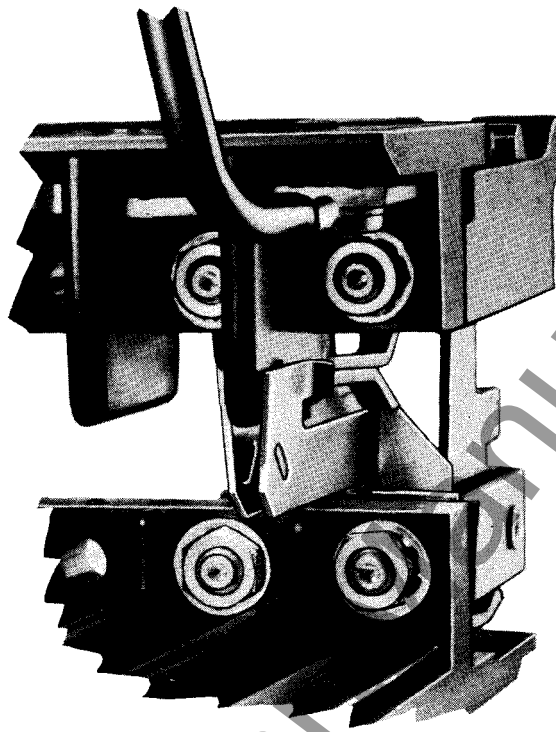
Auxiliary Short Circuiting Switch (Enlarged View)
